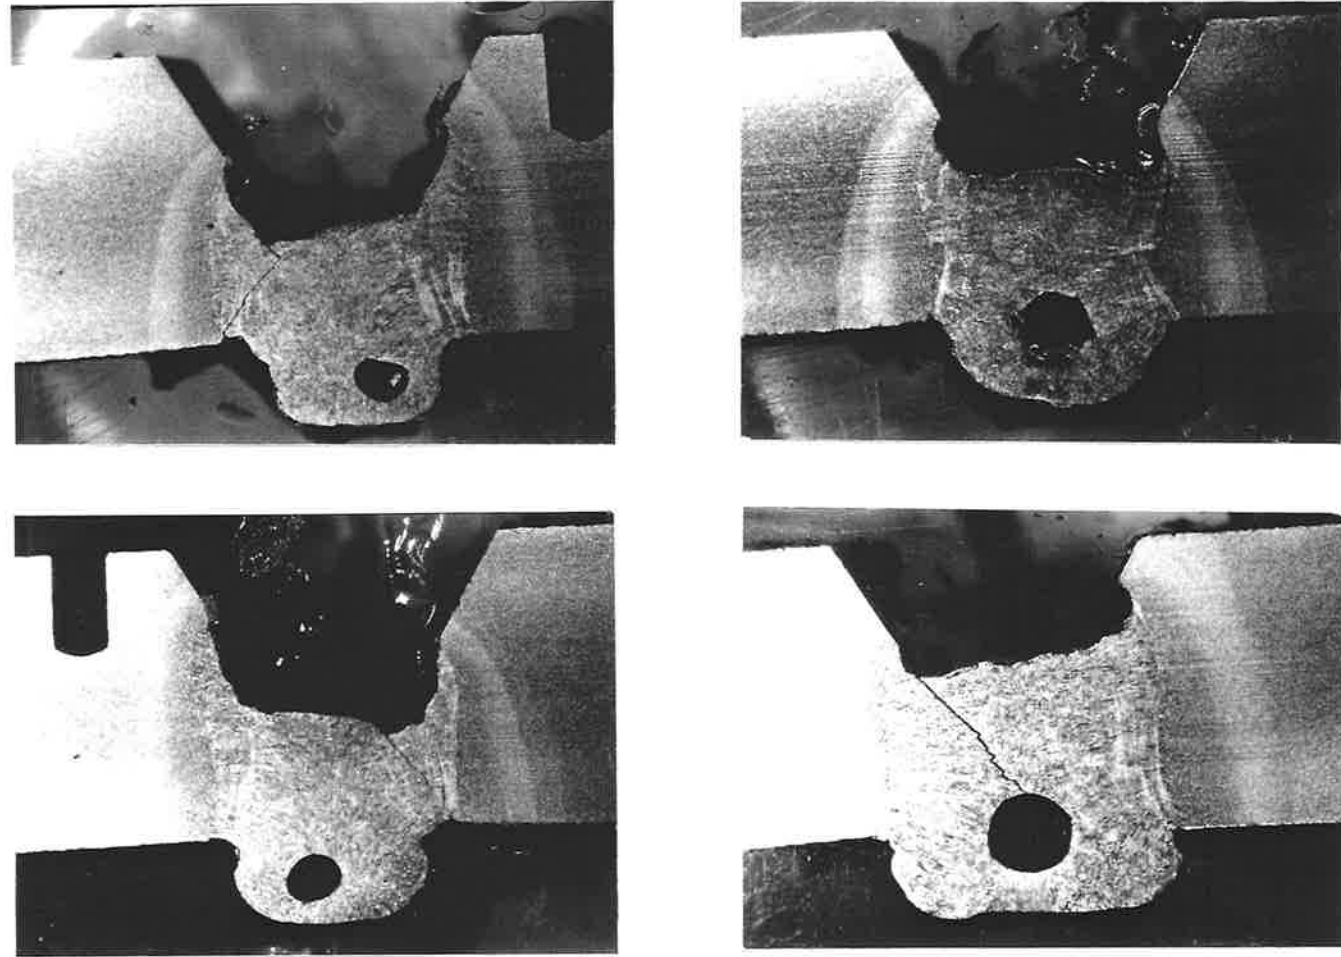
(continued): Macrographs of weld cross sections showing hollow bead pores in the reinforcement region. The welds were made in API X80 steel using cellulosic electrodes 4.0mm in diameter and E9010 specification during WIC cracking tests.
